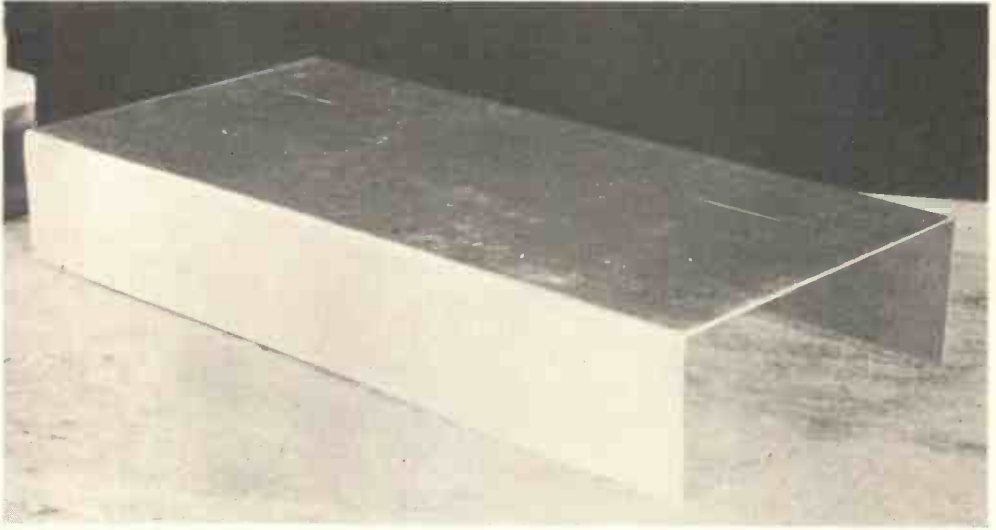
THE PARTLY COMPLETED ALUMINIUM CHASSIS BEFORE THE SIDES ARE FITTED.
